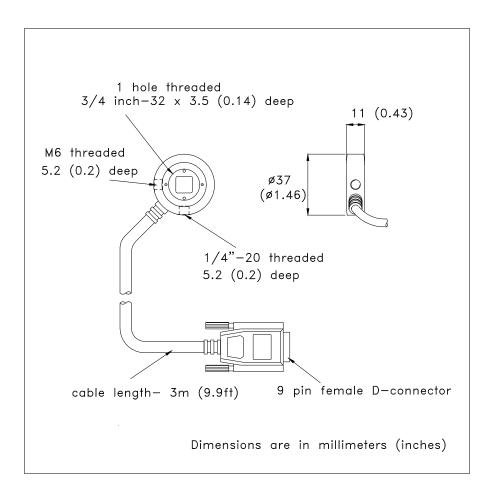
Head drawing OBP-A-9L and OBP-A-9H
